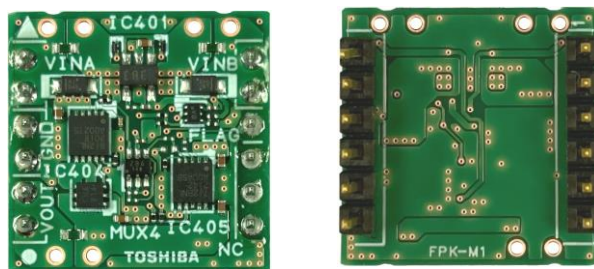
External View of Module Board MUX4 (Front Side, Back Side)
